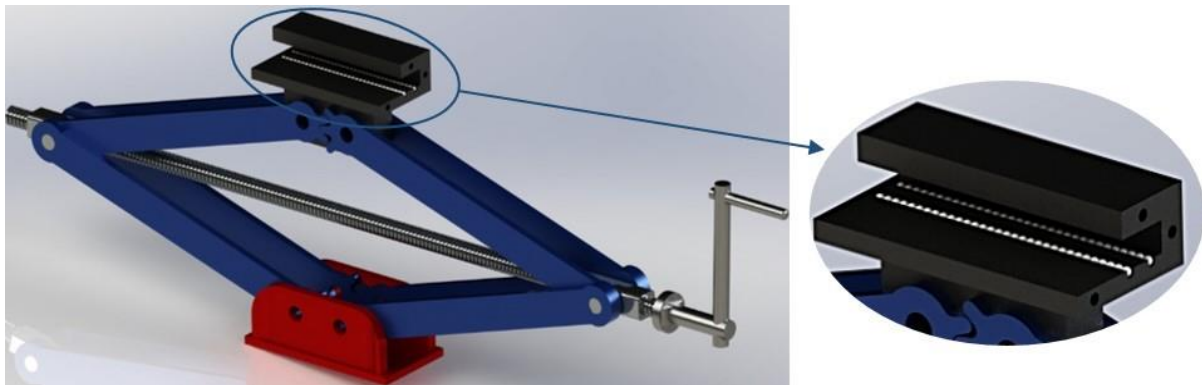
Four-bar linkage system Scissor Jack with lead screw height adjustment mechanism designed for the joint locking feature, highlighting the specialised linear ball bearings.
